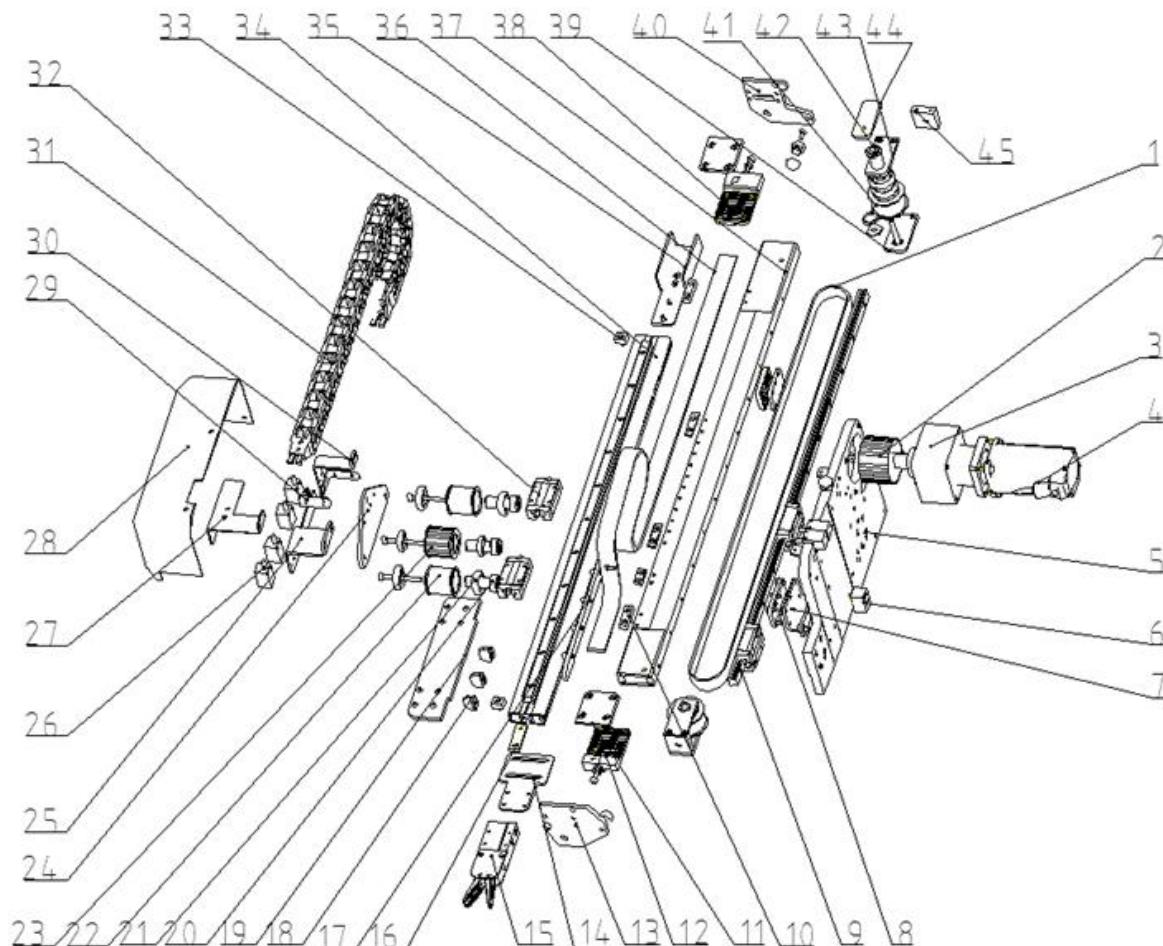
ST5-DT sub-arm unit(telescopic arm) exploded view
